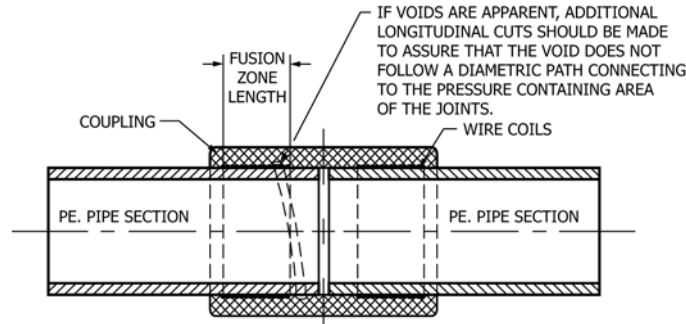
Coupling Fusion Assembly—Further Examination Guidance
